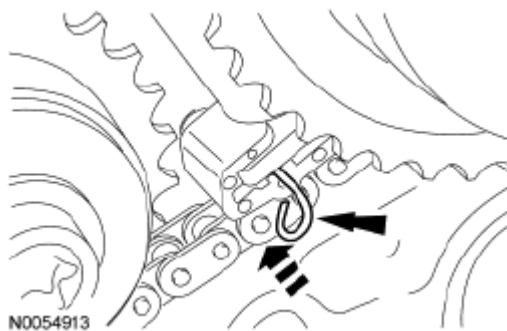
Compressing RH Secondary Timing Chain Tensioner
